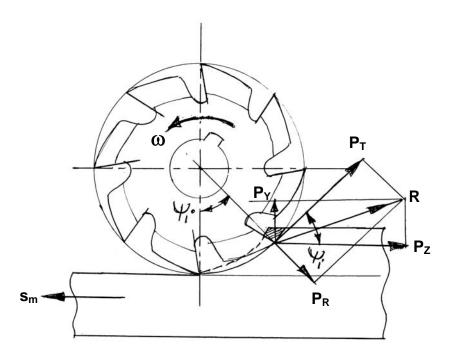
Cutting forces developed in plain milling (with single tooth engagement)
